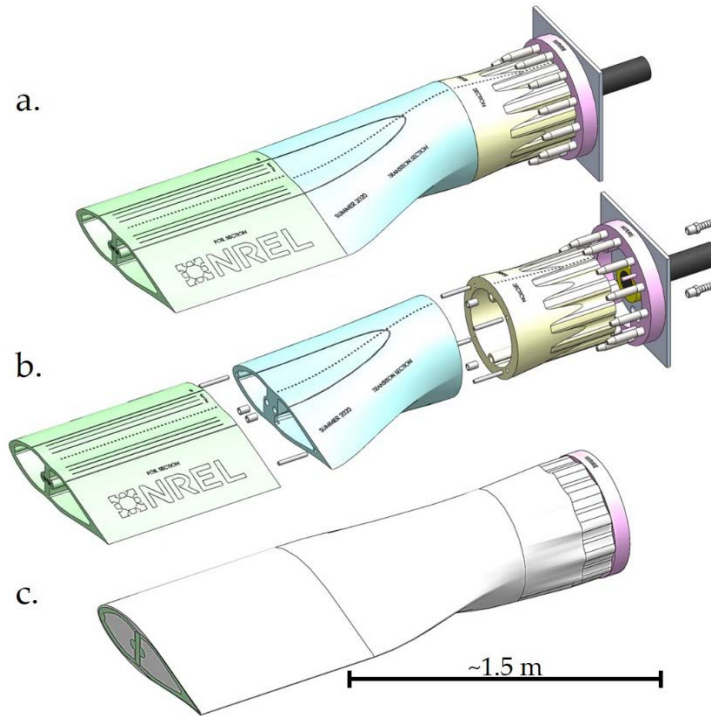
Computer-aided design drawings showing the AM design: (a) the assembled AM mold, (b) an exploded view of the AM mold, and (c) the AM mold with a composite overlay
